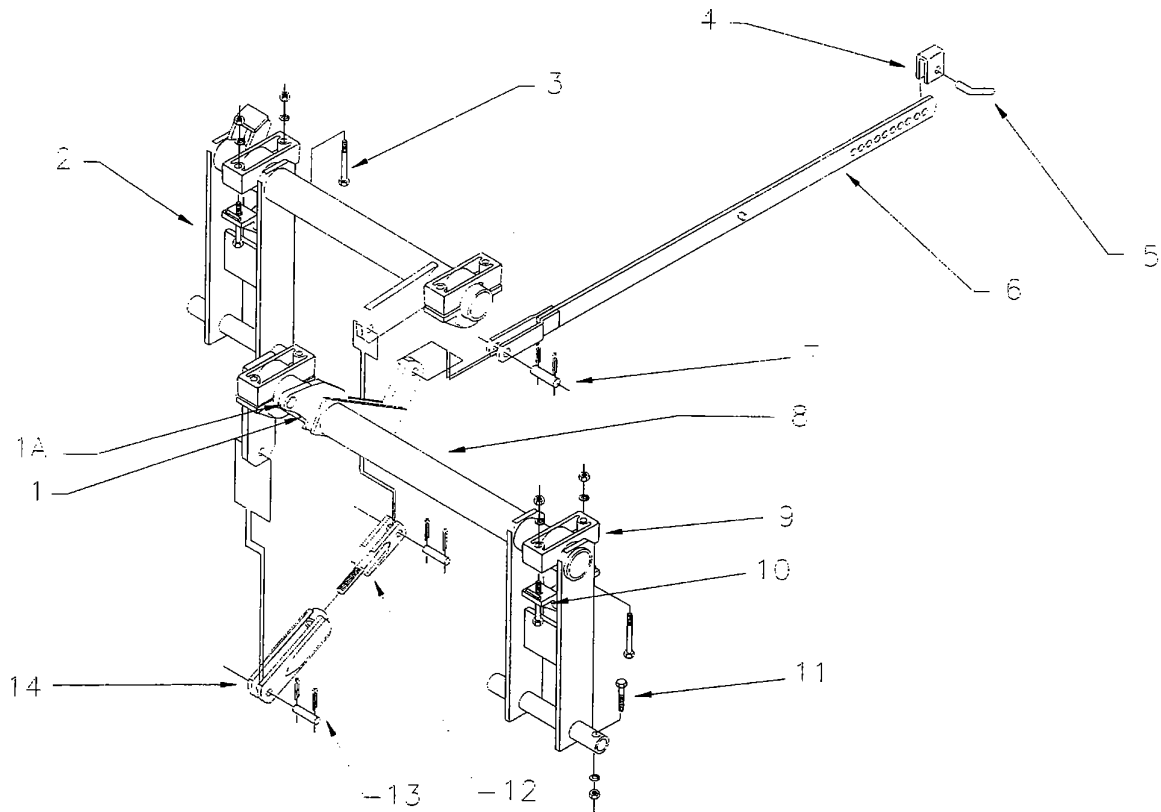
LARGE FRAME WHEEL LIFT COMPONENTS
